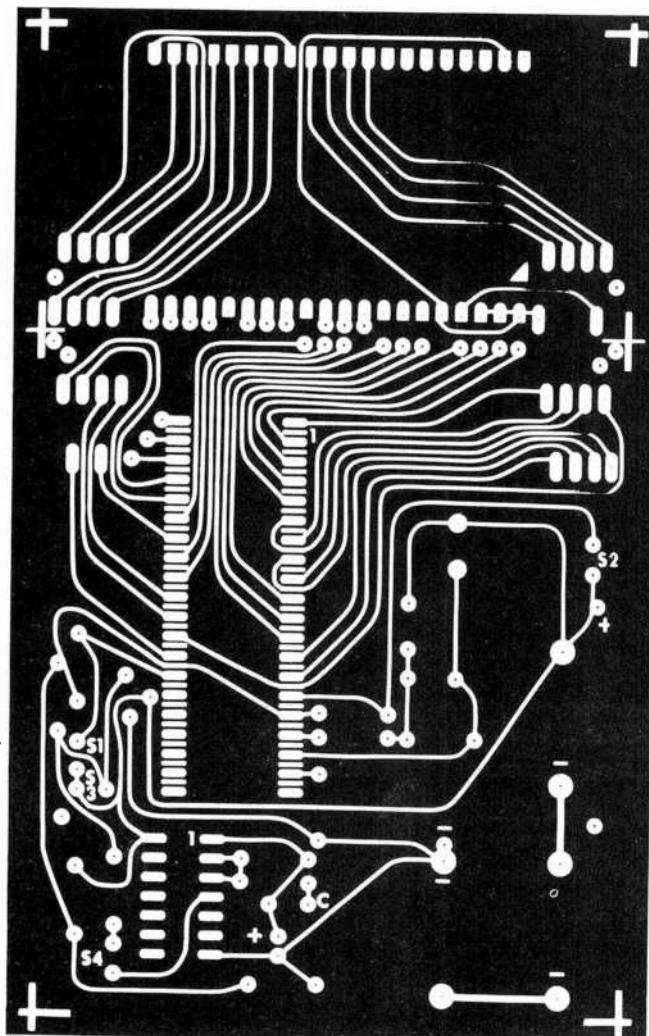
Actual-size foil pattern for the clock main and display board is at left. Component layout is shown above. After completing the board, carefully separate the two parts.
